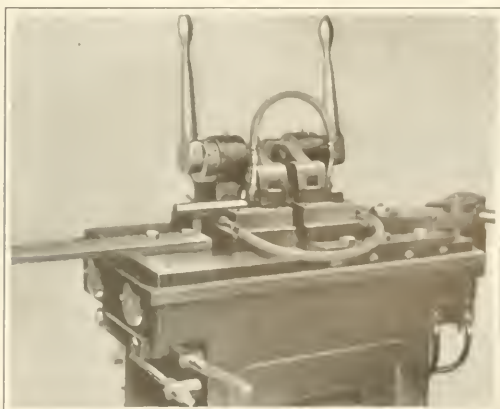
Close View of Mechanism of Detroit Electric Butt Welding Machine
